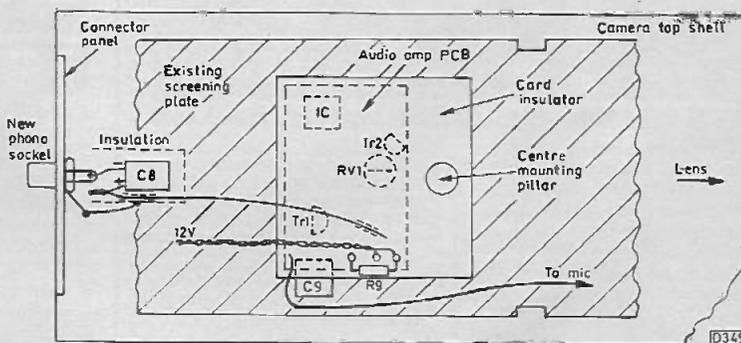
Mounting the audio module behind the camera's processor PCB. The camera is depicted lying on its topside. The audio module's card insulator should cover it completely and be a tight fit on the pillar.
